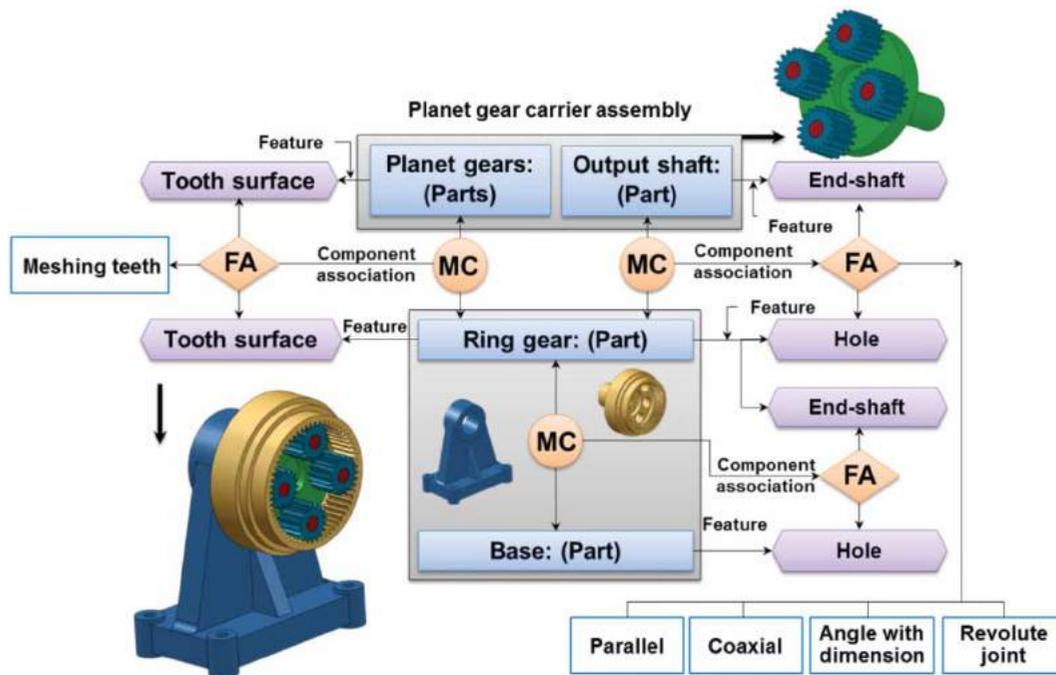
Assembly relationships between ring gear base assembly and planet gear carrier assembly [8].
